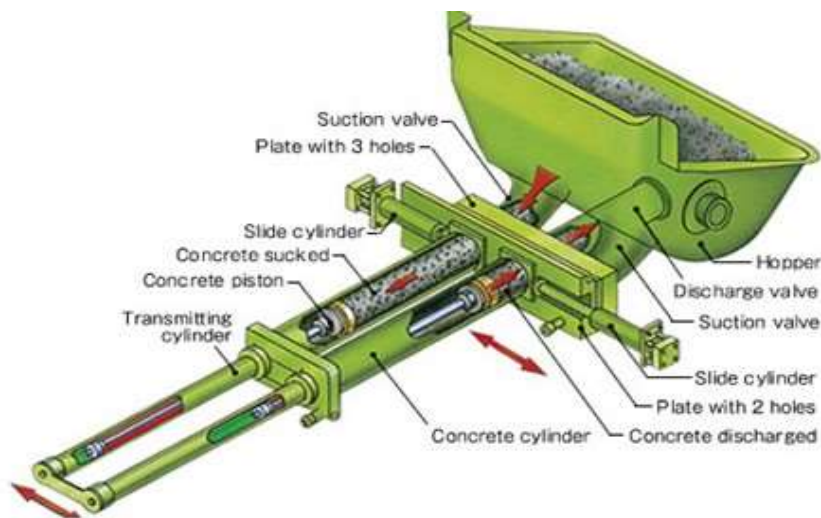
Hydraulic pump and its component of a concrete pump
